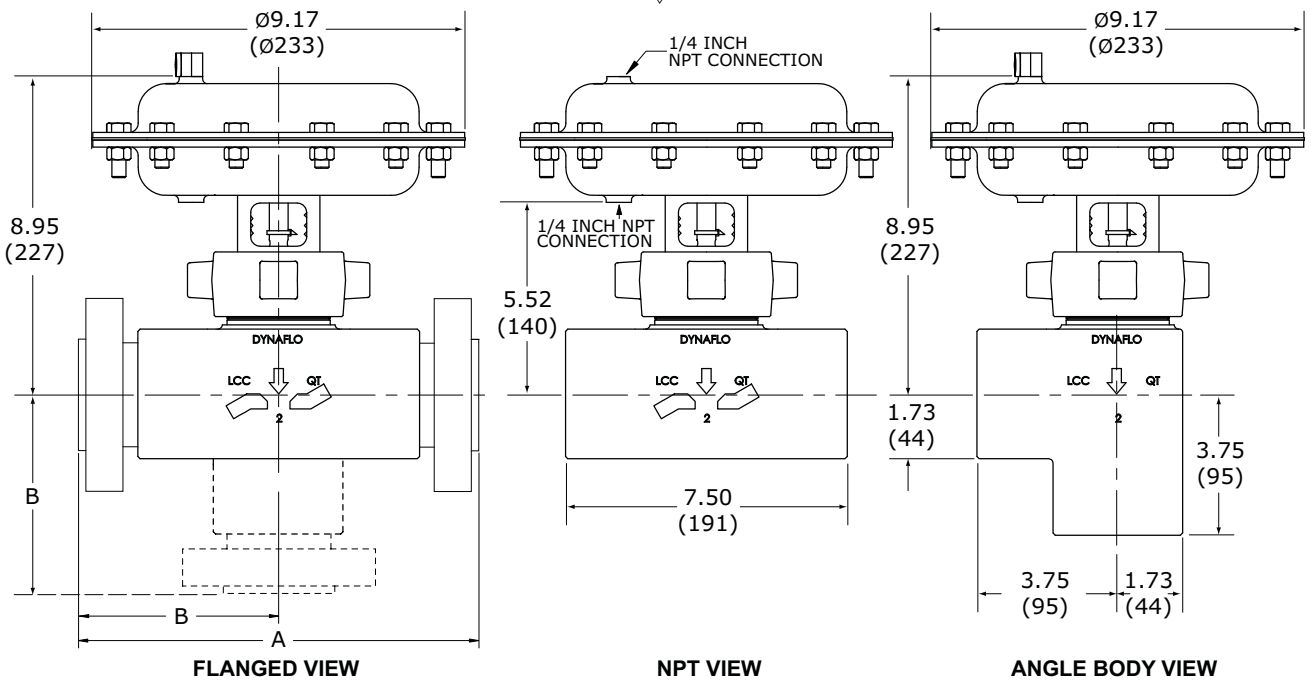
DF233 2 inch Control Valve Dimensions inch (mm)
